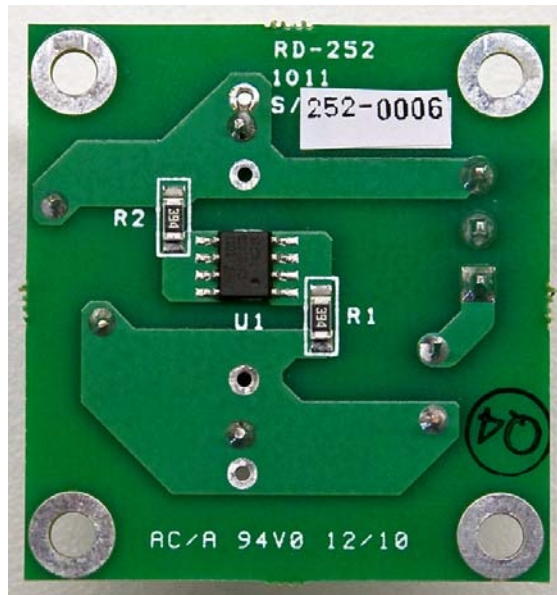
Populated Circuit Board Photograph, Solder Side.
